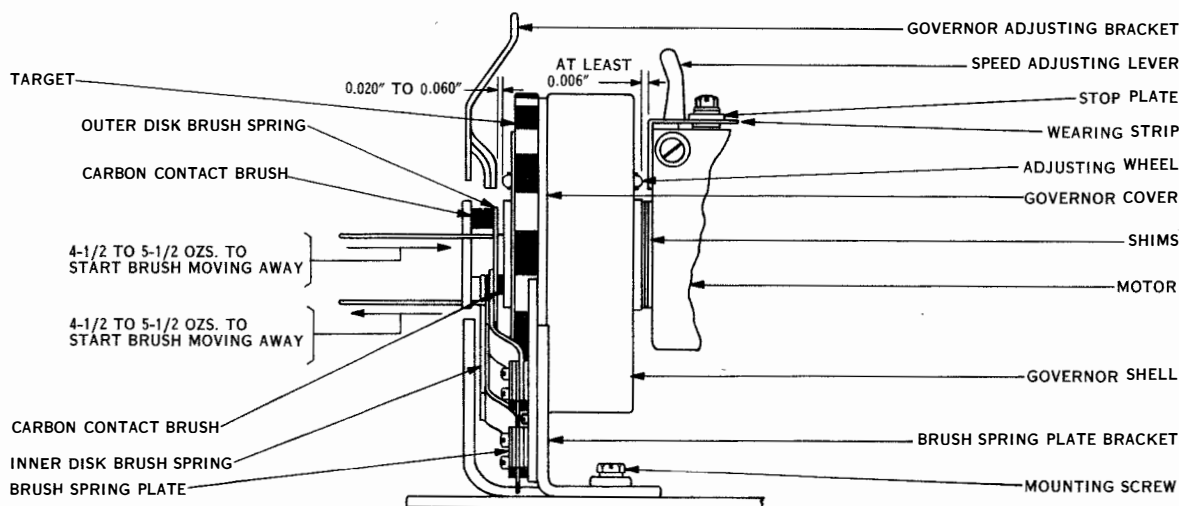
Speed Adjusting Lever Stop Plate, Wearing Strip, and Governor Brush Springs
